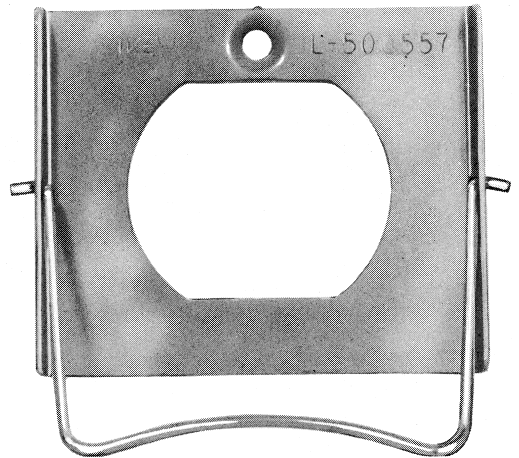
Clamp for Mounting Early Version KS-20426L3 (MD) Transformer Not Equipped With Molded Mounting Tab
